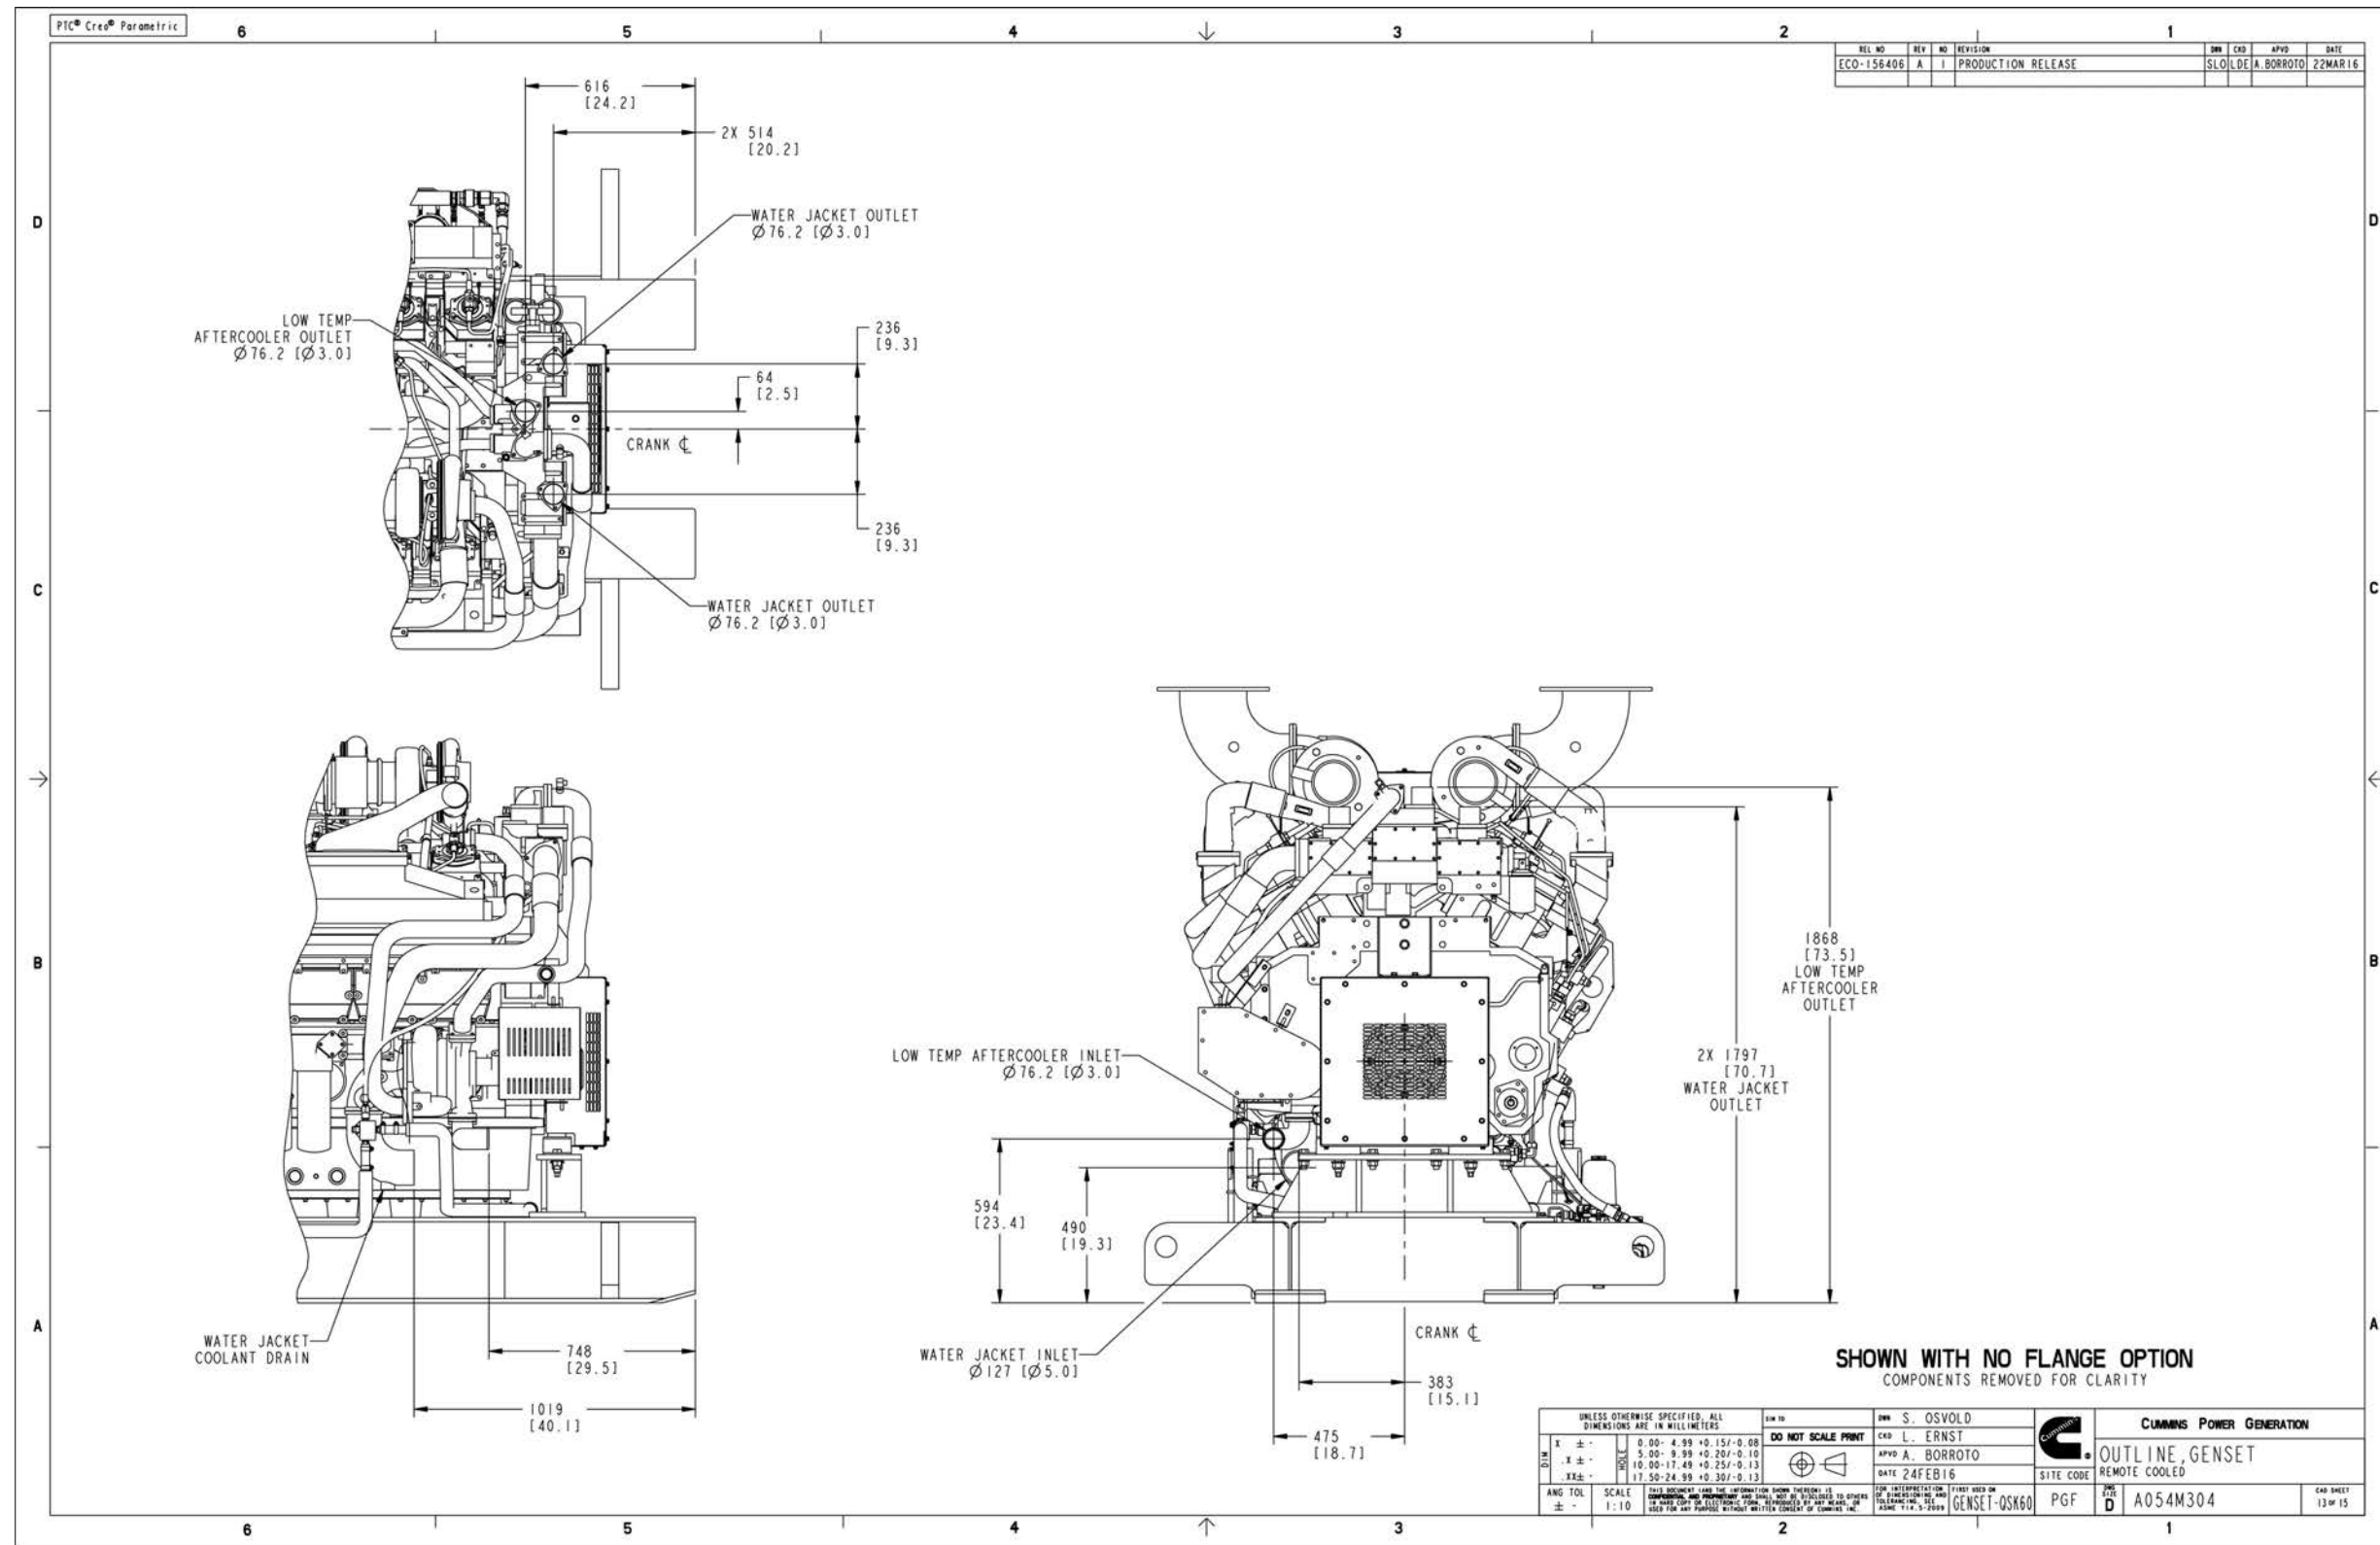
GENERATOR SET WITH REMOTE COOLING OUTLINE DRAWING (SHEET 13)
